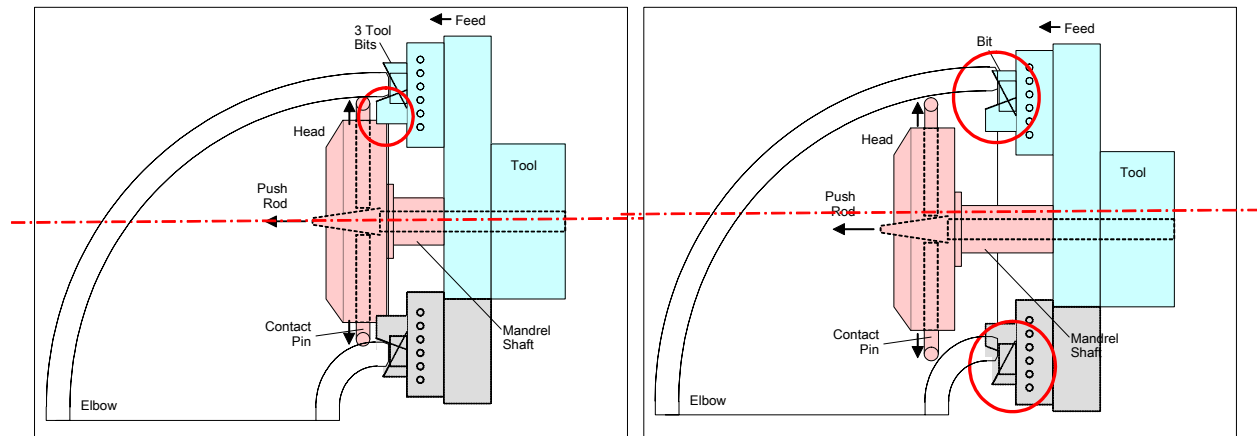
Illustration of problems encountered when applying the edge beveling machine to fittings. Shown in interference between the tool bit and the fixture (left), and misalignment of the tool bits (right).
